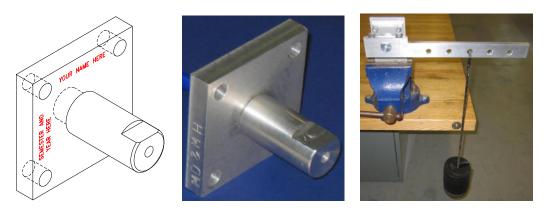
Laboratory assignment requiring milling, turning and tight tolerance control for the press-fit assembly to sustain a given applied torque.
